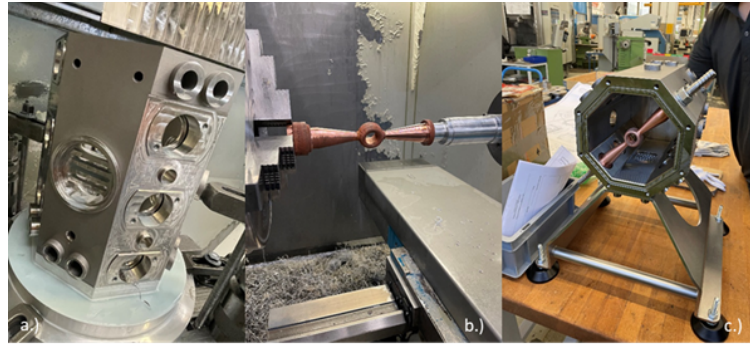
Development of miniaturized accelerator structures. Part a.) shows the 3D metal printed miniaturized tank during the drilling process to achieve the final dimensions with adequate surface quality. b.) shows the similar process for the miniaturized drift tube, while the right panel c.) shows the finally mounted complete structure.
